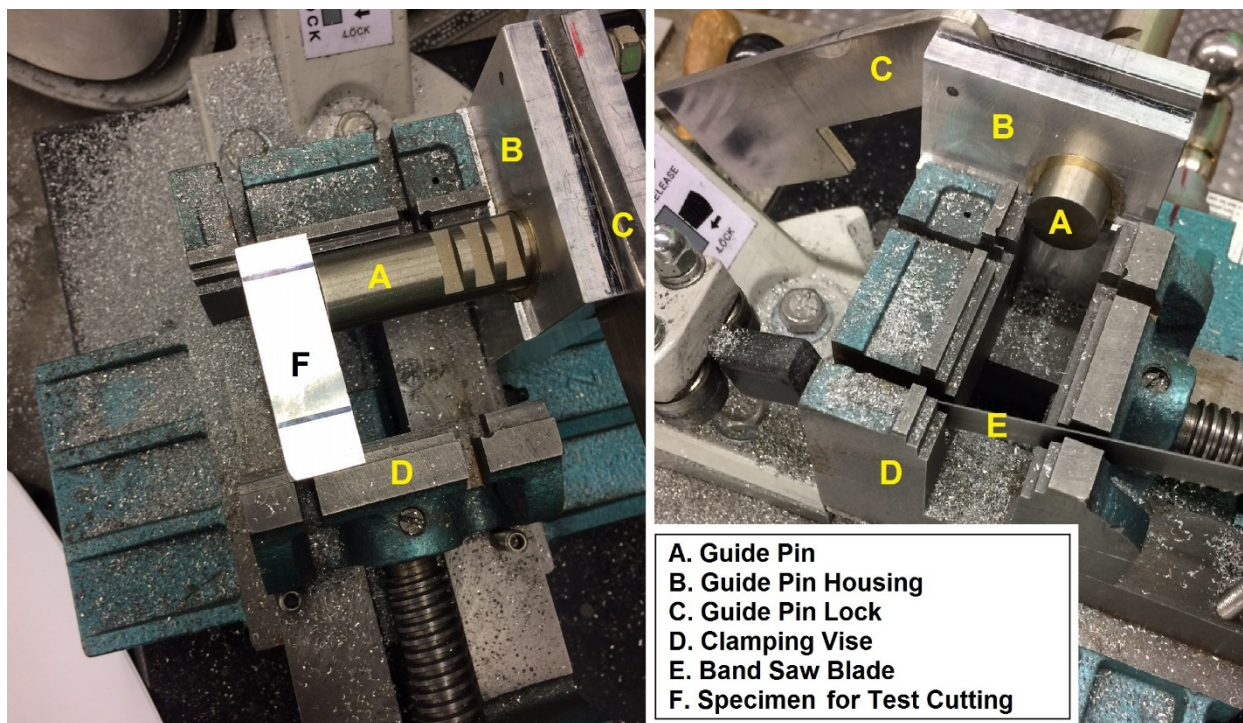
Images of Custom Hot Cell Band Saw Hardware; Blade Raised and Sample Clamped (Left), Blade Lowered and Sample Removed (Right)
